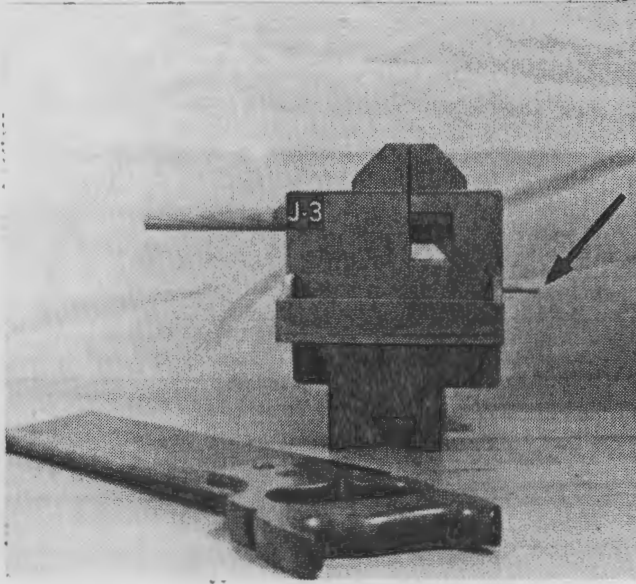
Figure V. This jig and backsaw were used to saw the dowel rods to the proper length. If the part became lodged in the jig, the operator used the ejection pin located at the right side of the jig (arrow).
